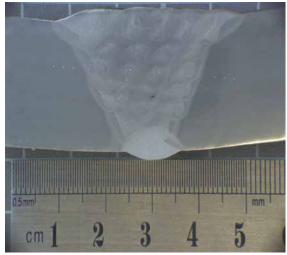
As prepared and etched weld component showing the weld passes, the heat affected zone on either side of the weld and the base metal.
